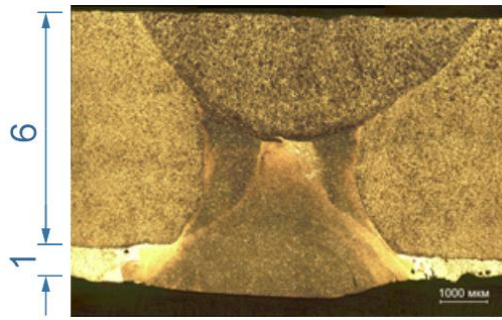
shows photos of the cross-section of the welded samples.
